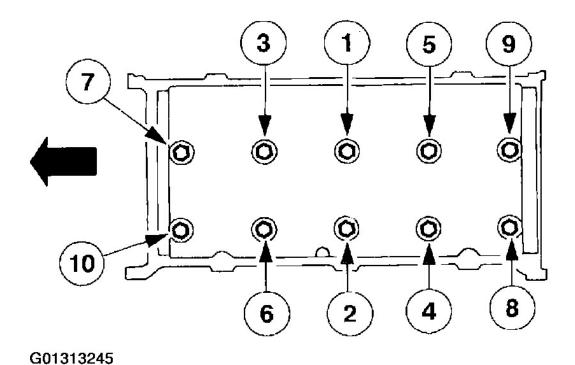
Head Bolts Tightening sequence Courtesy of FORD MOTOR CO.
